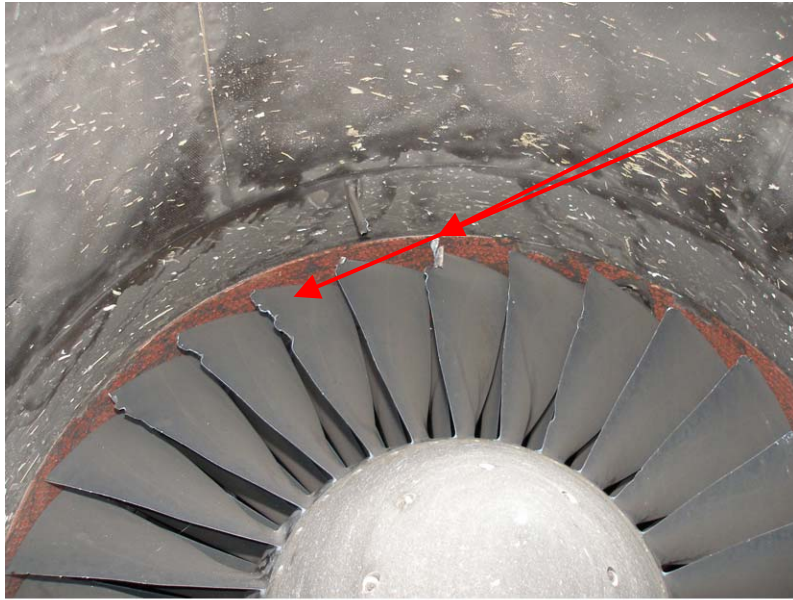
Right-hand engine – Fan blades with ‘soft’ impact damage
